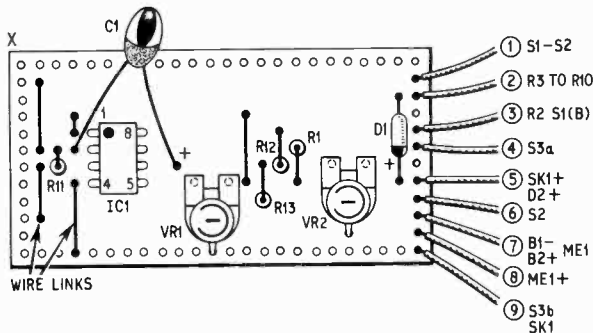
The components assembled on 0.1in matrix board with the copper strip side shown below
